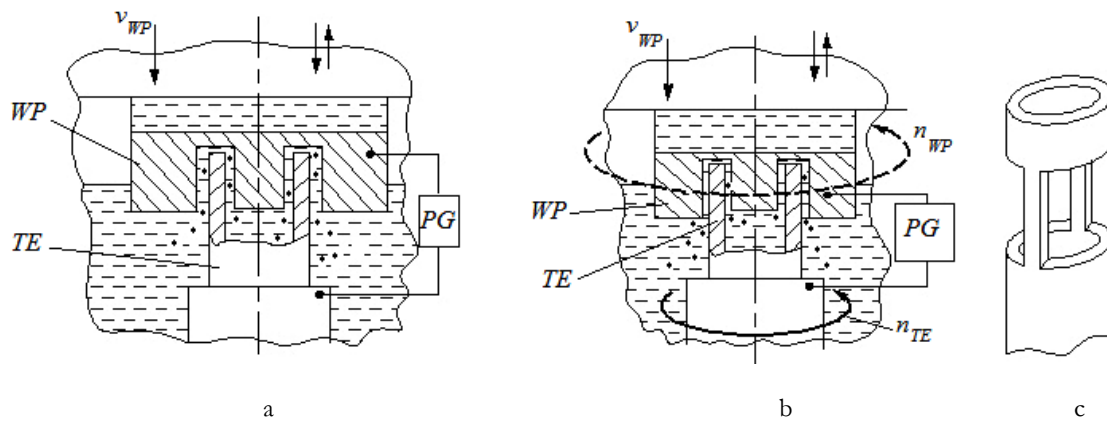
Improved solutions of detaching cylindrical part by electrical discharge machining: a - machining schema without tool electrode rotation motion; b – machining schema by use of a supplementary tool rotation motion; c – tool electrode modified in order to increase the machining accuracy.
